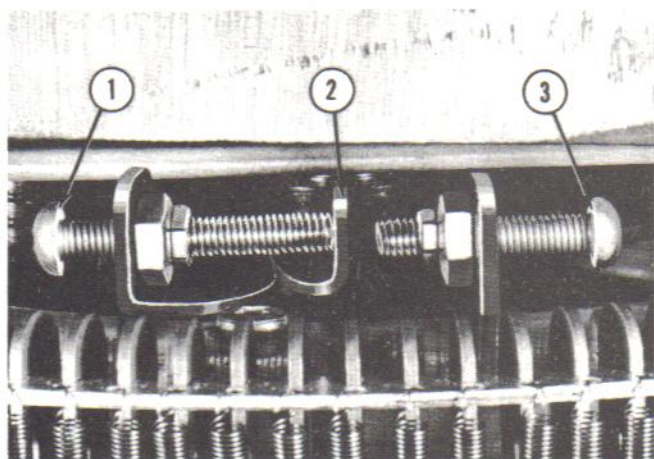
STOP SCREW ADJUSTMENT, 2504
